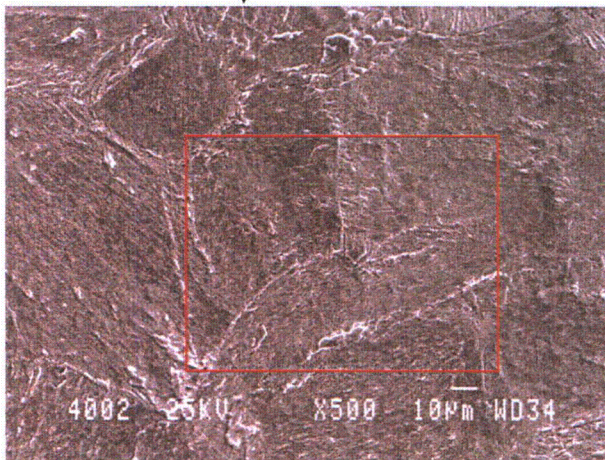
Appearance of fracture surface of TP A-2 (sample A)
